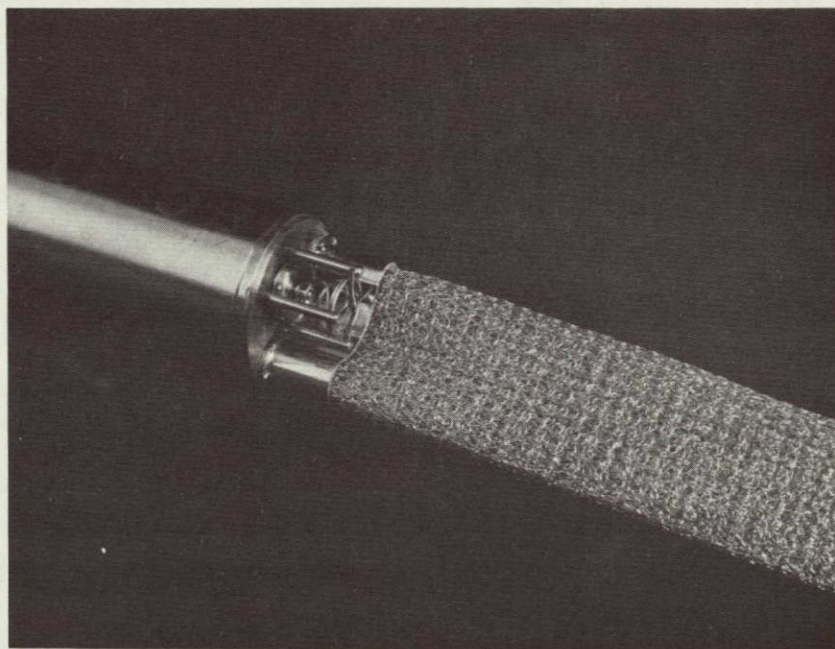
Test Subassembly of the Ammonia Vapor-Modulated Heat Pipe After Assembly.
